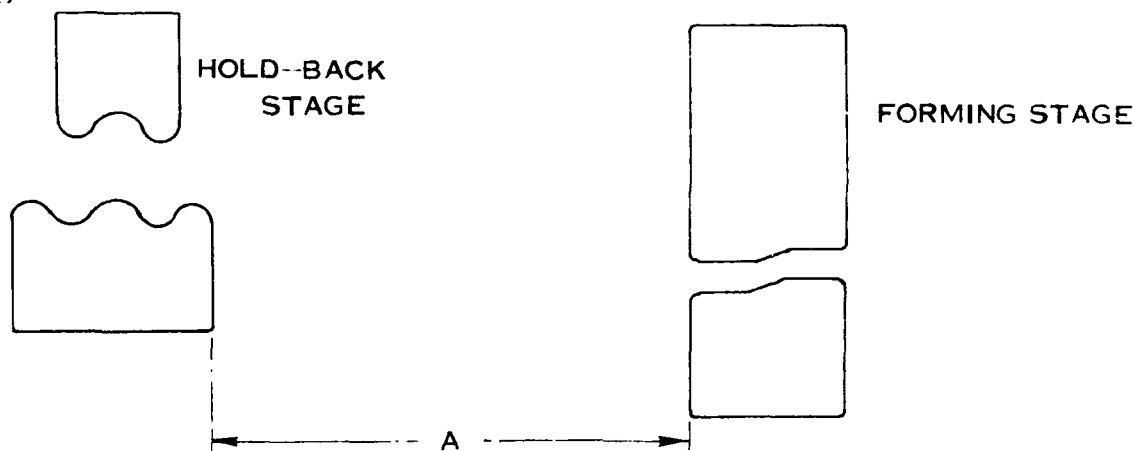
DIMENSION "A" BETWEEN HOLD BACK AND FORMING STAGES (ANDROFORMING)
